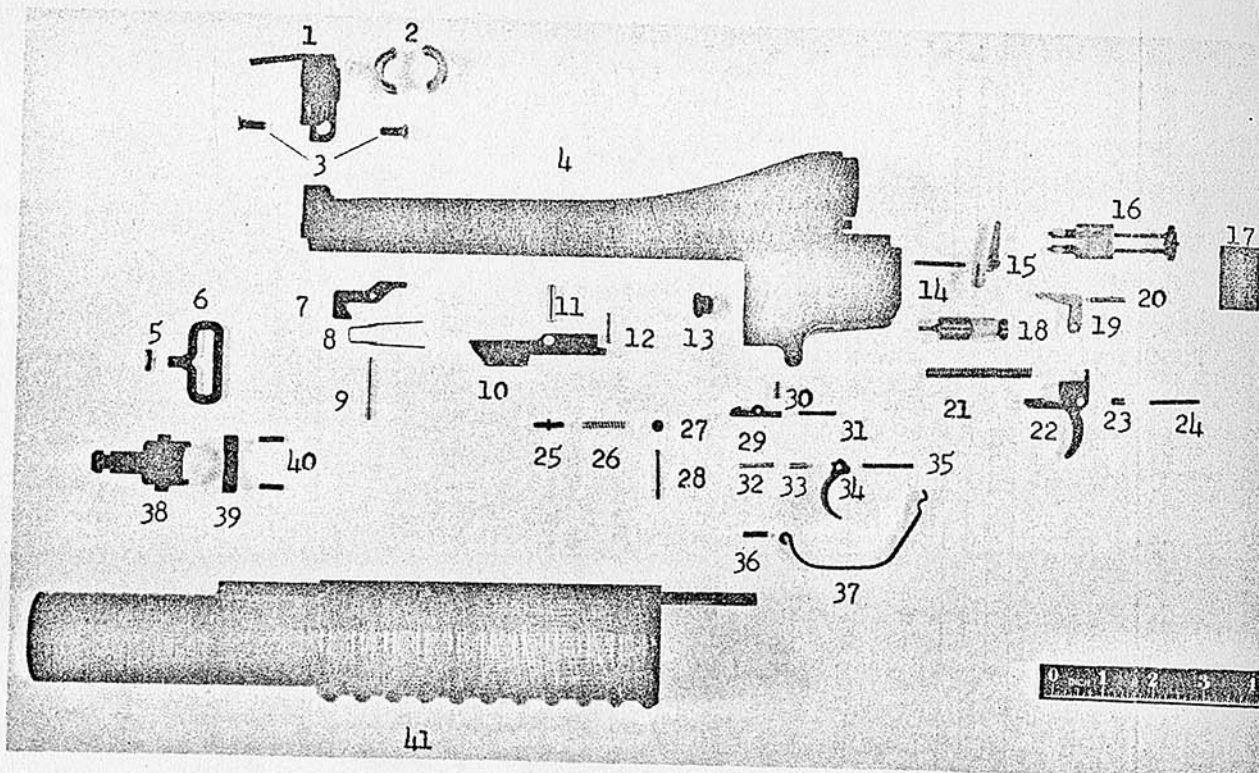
Disassembled View of XM203 Grenade Launcher.
